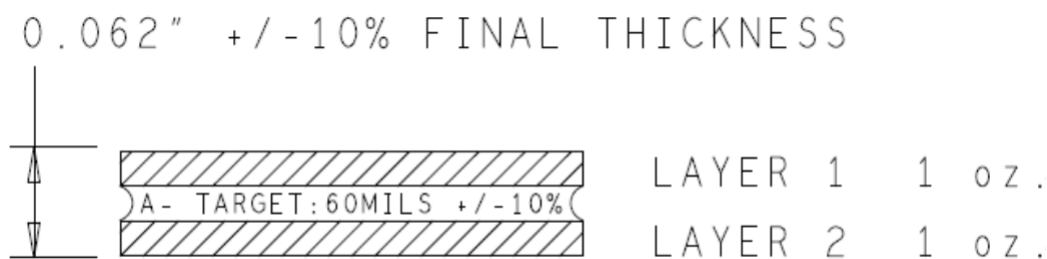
KW40-HRM-RD PCB stackup cross-section (two layer)
